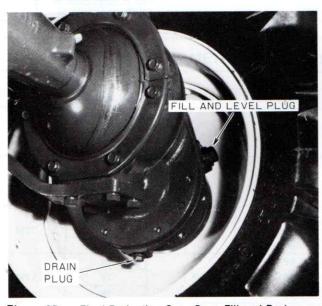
Final Reduction Gear Case Fill and Drain Plugs
